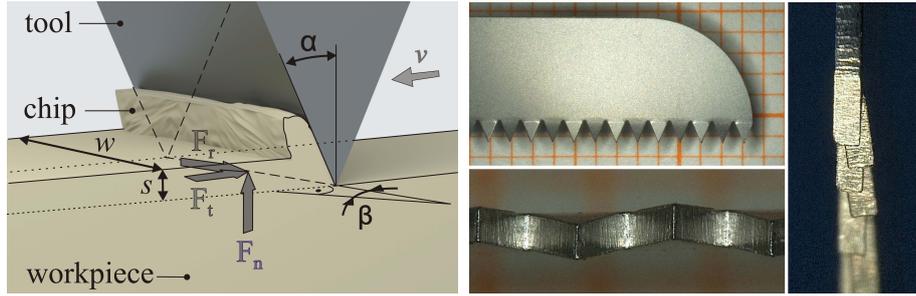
(Left) Components of the cutting force. (Right) Sawing Blade.
